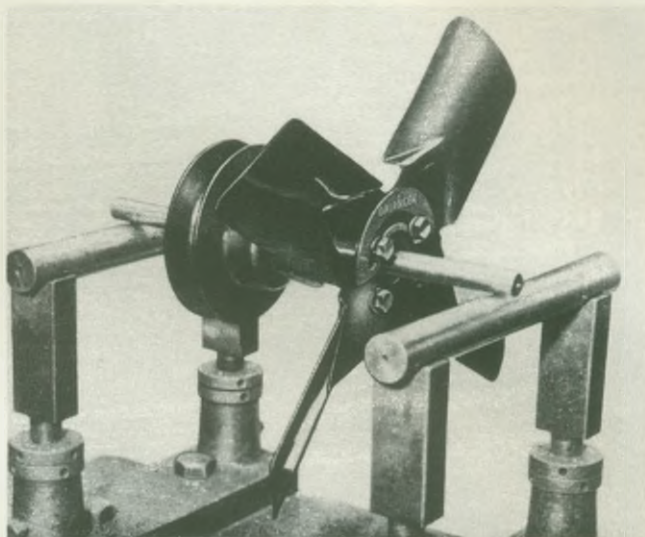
The balancing of fan blade assembly, also showing the hole to be drilled for location of balancer
